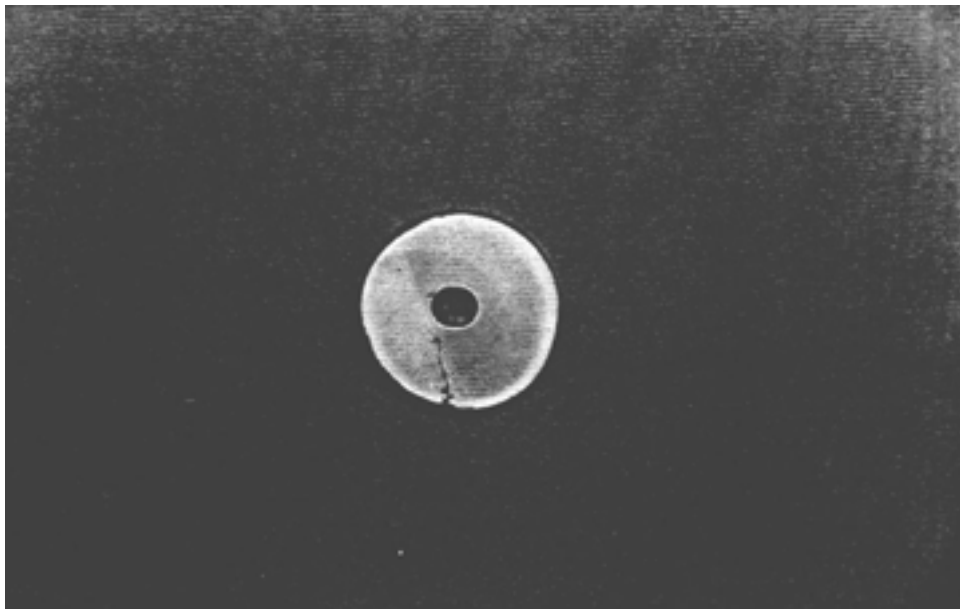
A Dye Penetrant Being Performed to Confirm That the Crack Did Not Extend Beyond the Upper End of the Hole
